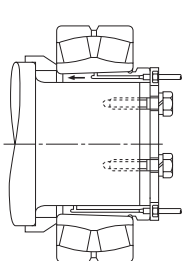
Mounting with Special Sleeve and Hydraulic Pressure
